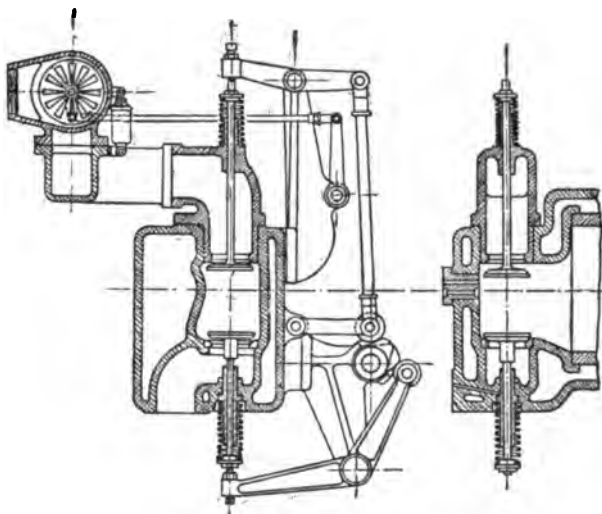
Valve Gear, Jacobson Throttling Engine.
